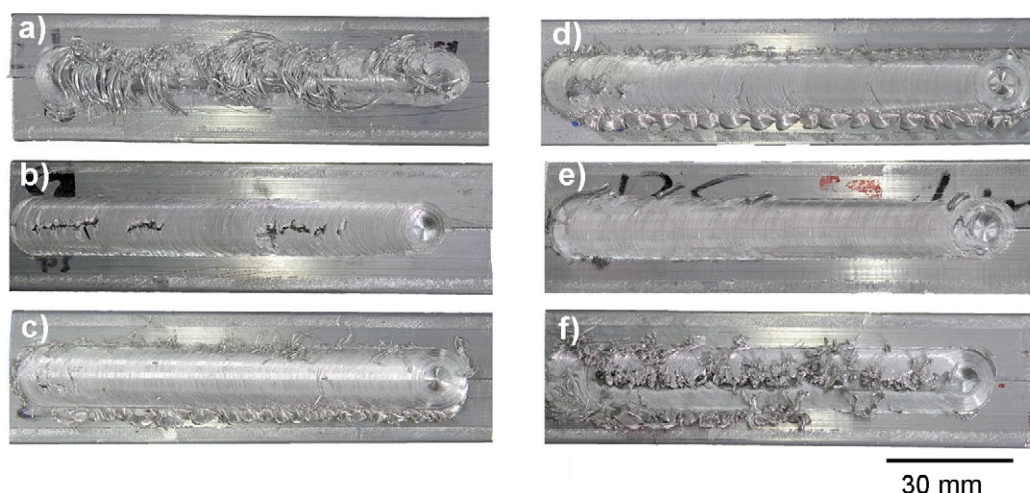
Surface morphology of FSW joints produced at different tool rotational speeds: (a) 600, (b) 800, (c) 1000, (d) 1100, (e) 1200, (f) 1400 rpm; welding speed was 150 mm/min
